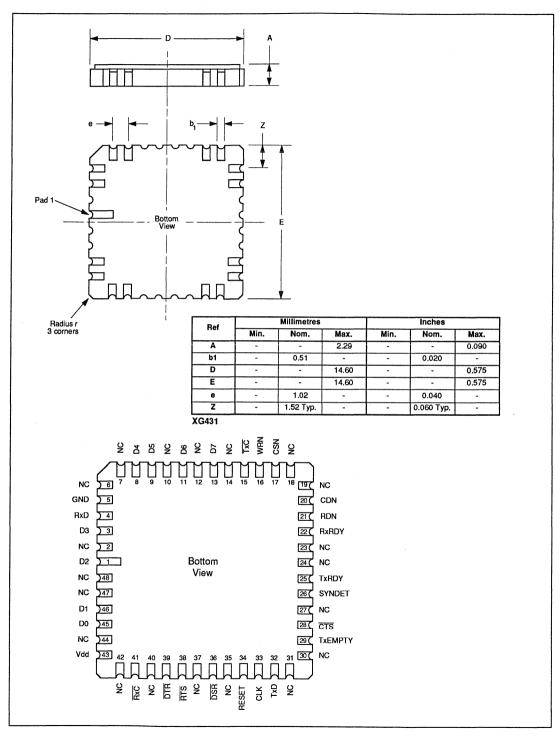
48-Pad Leadless Chip Carrier - Package Style L
